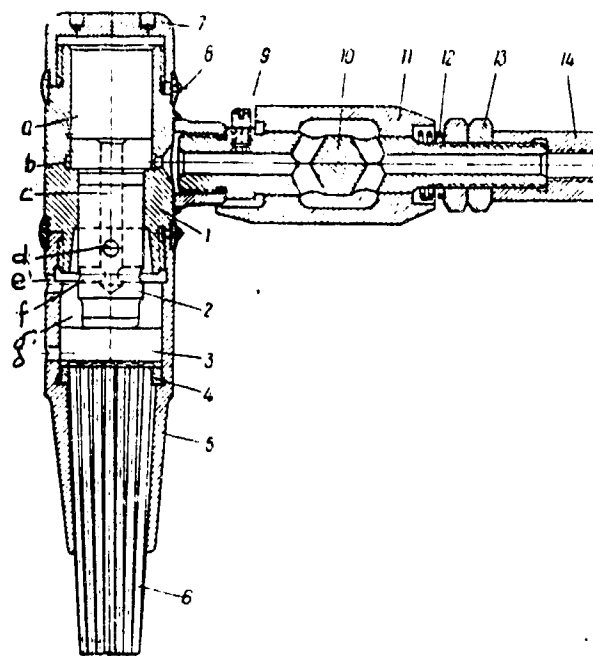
Cluster-Type of Pneumatic Hammer: a - upper chamber; b - annular duct; c, d, and f - channels; g - lower chamber; e - outlet holes; 1 - frame; 2 - striker (face); 3 - bushing; 4 - screen; 5 - sleeve; 6 - cluster of rods; 7 - cover; 8 - plug; 9 - pressure screw; 10 - bypass pawl; 11 - bypass coupling; 12 - spring; 13 - nut; and 14 - connecting sleeve.
